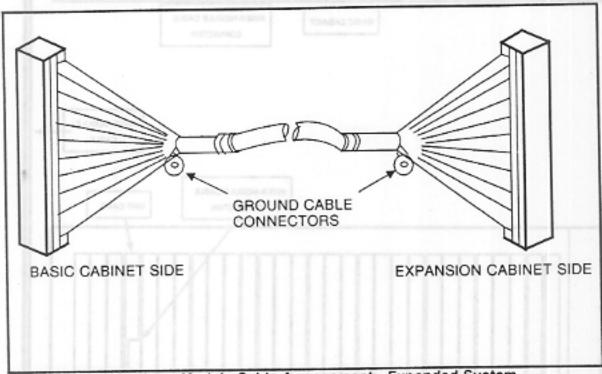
Inter-Module Cable Arrangement - Expanded System
